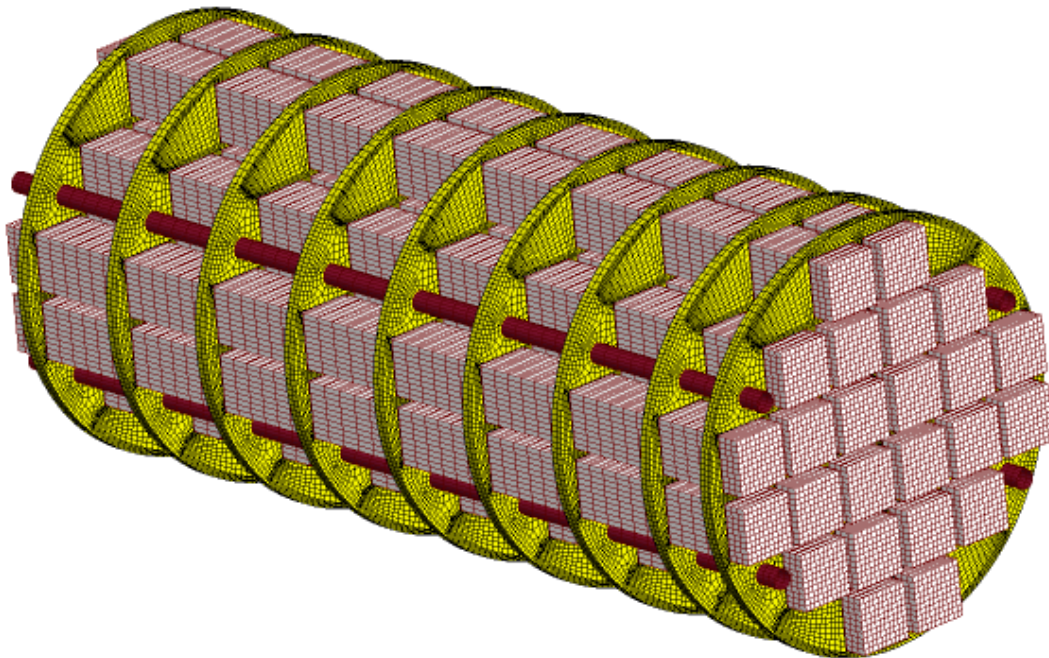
Three-dimensional view of the DSC internal showing the fuel region, support rod, guide sleeve, spacer disk, and guide rails
